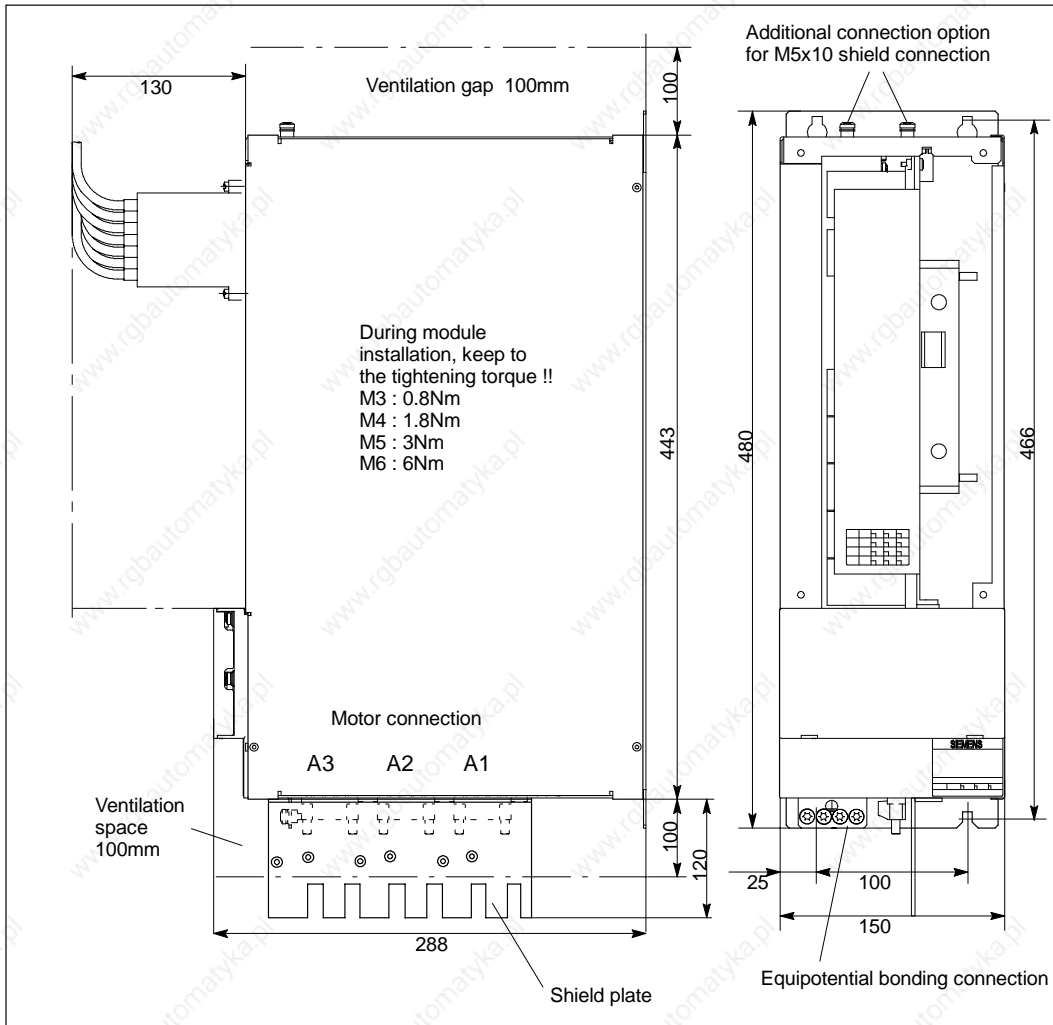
Dimension drawing of the 3-axis CCU box
